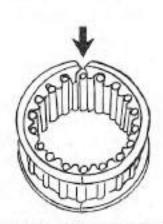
Connecting rod bearing cages have one ground corner as indicated by arrow. Ground corners must be matched during assembly.
